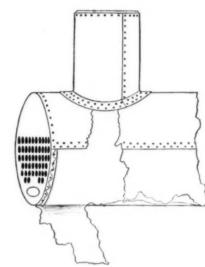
Front End of Left-hand Boiler, Showing Torn Plates.
